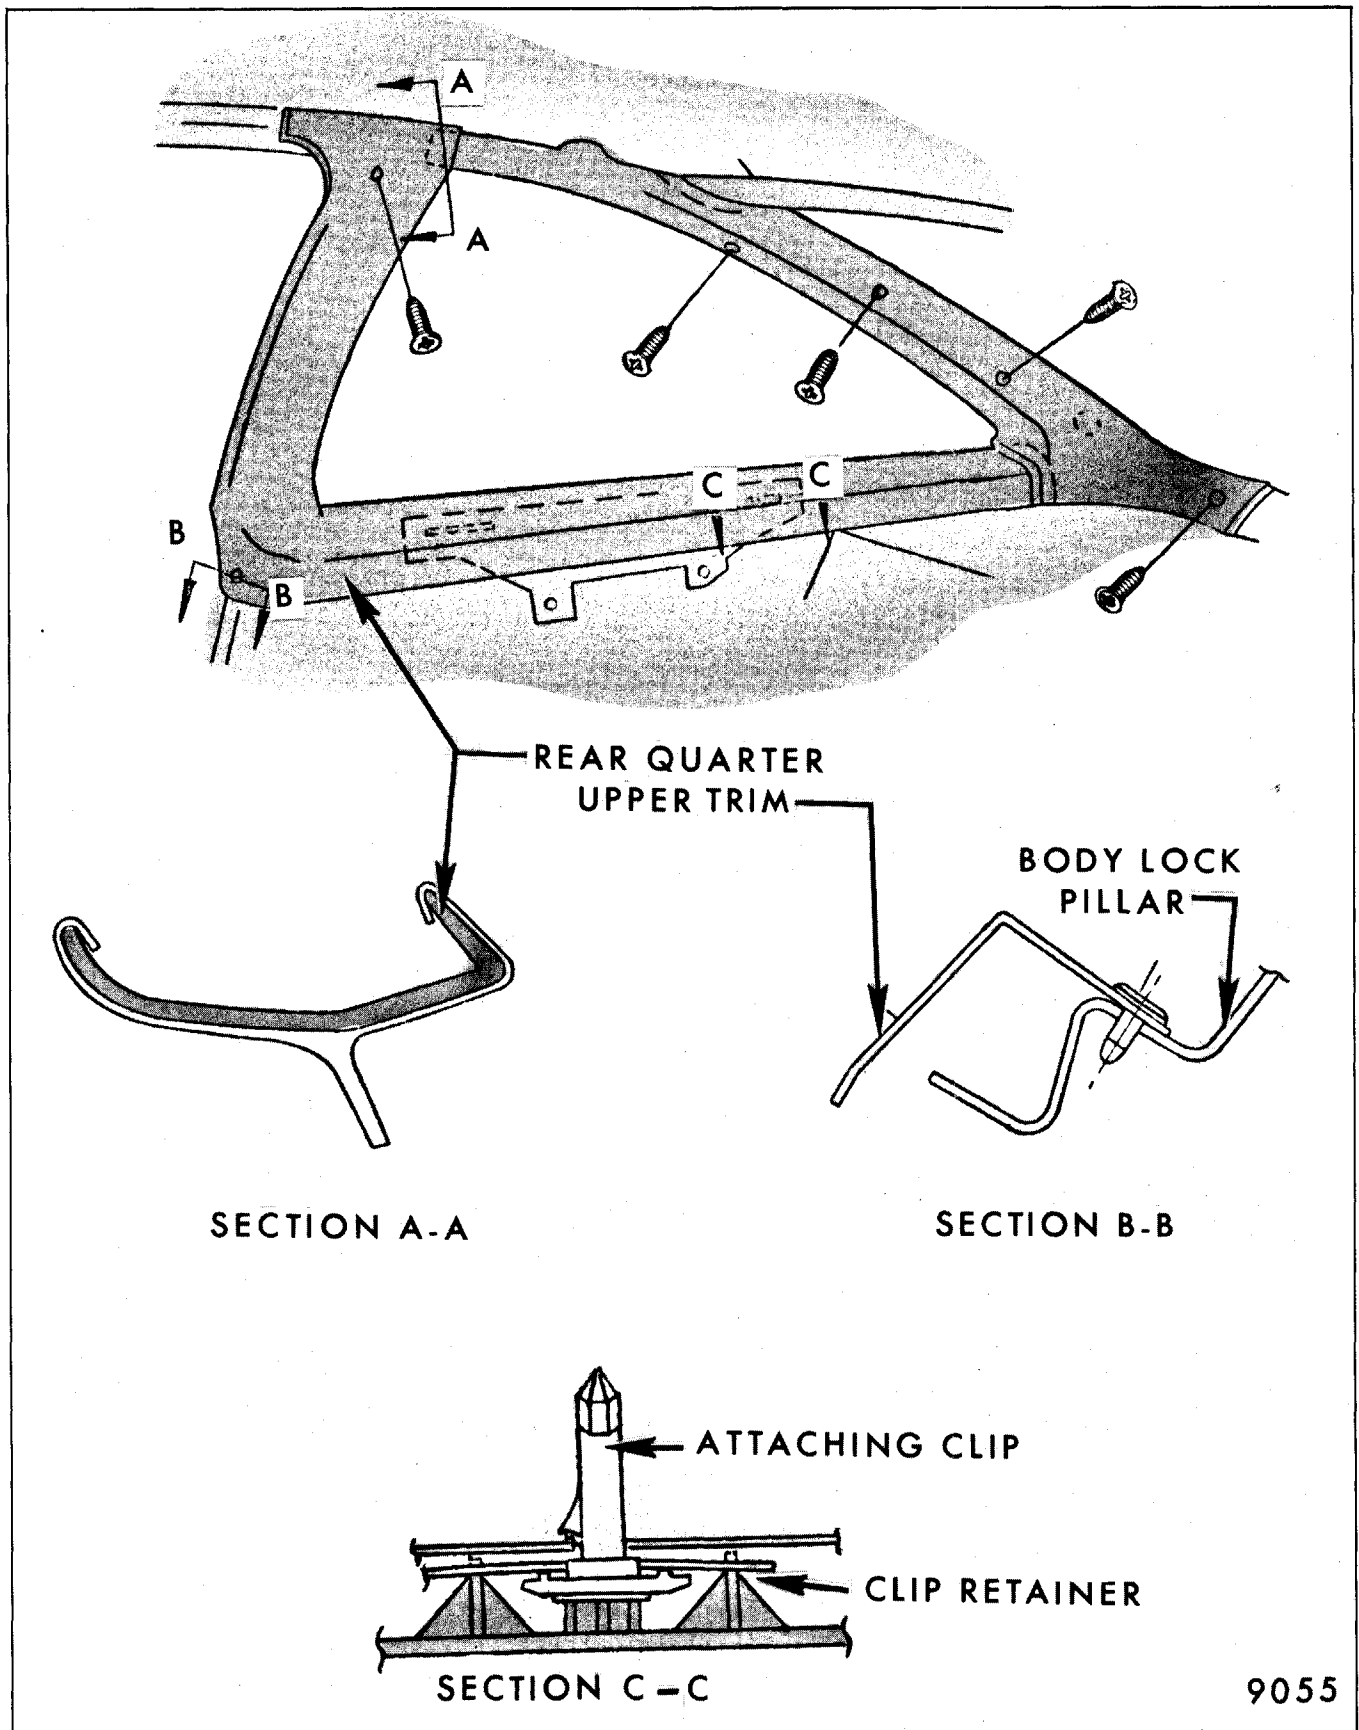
Quarter Upper Trim Attachment "A-37" Styles
